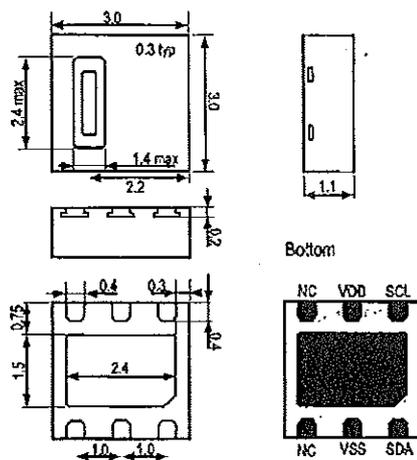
Drawing of SHT21P sensor package, dimensions are given in mm (1mm = 0.039inch), tolerances are ± 0.1 mm. The die pad (center pad) is internally connected to VSS. The NC pads must be left floating. Numbering of EAO pads starts at lower right corner (indicated by notch in die pad) and goes clockwise (compare Table 2).
